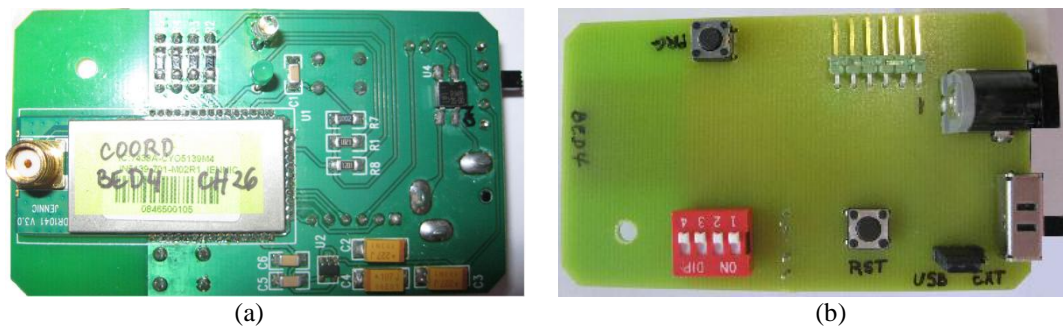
Coordinator/router electronic PCB: (a) top side and (b) rear side.
